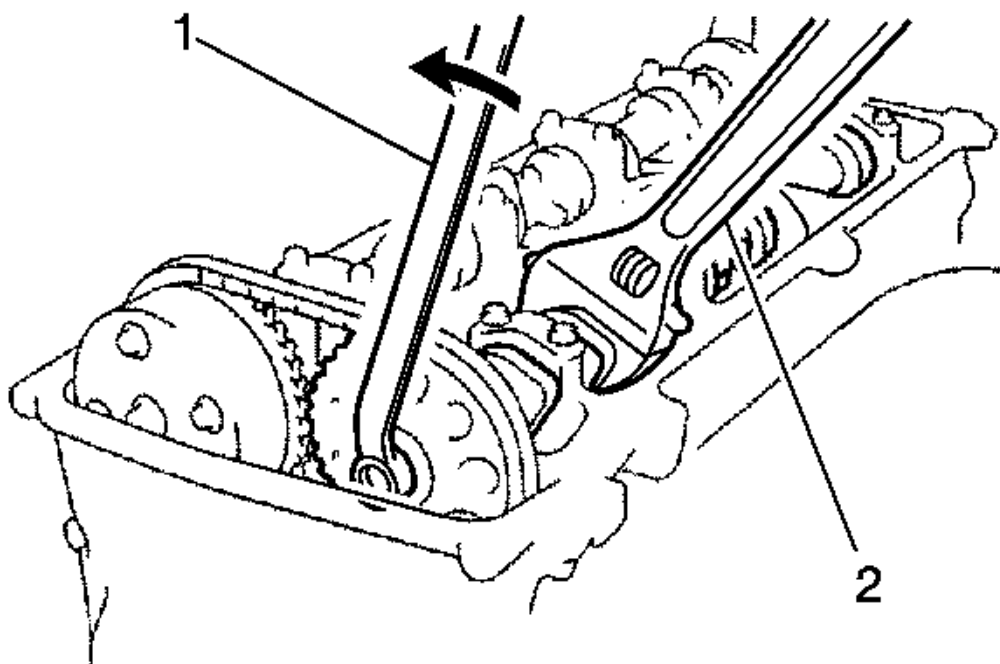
Identifying Camshaft Timing Gear & Sprocket
